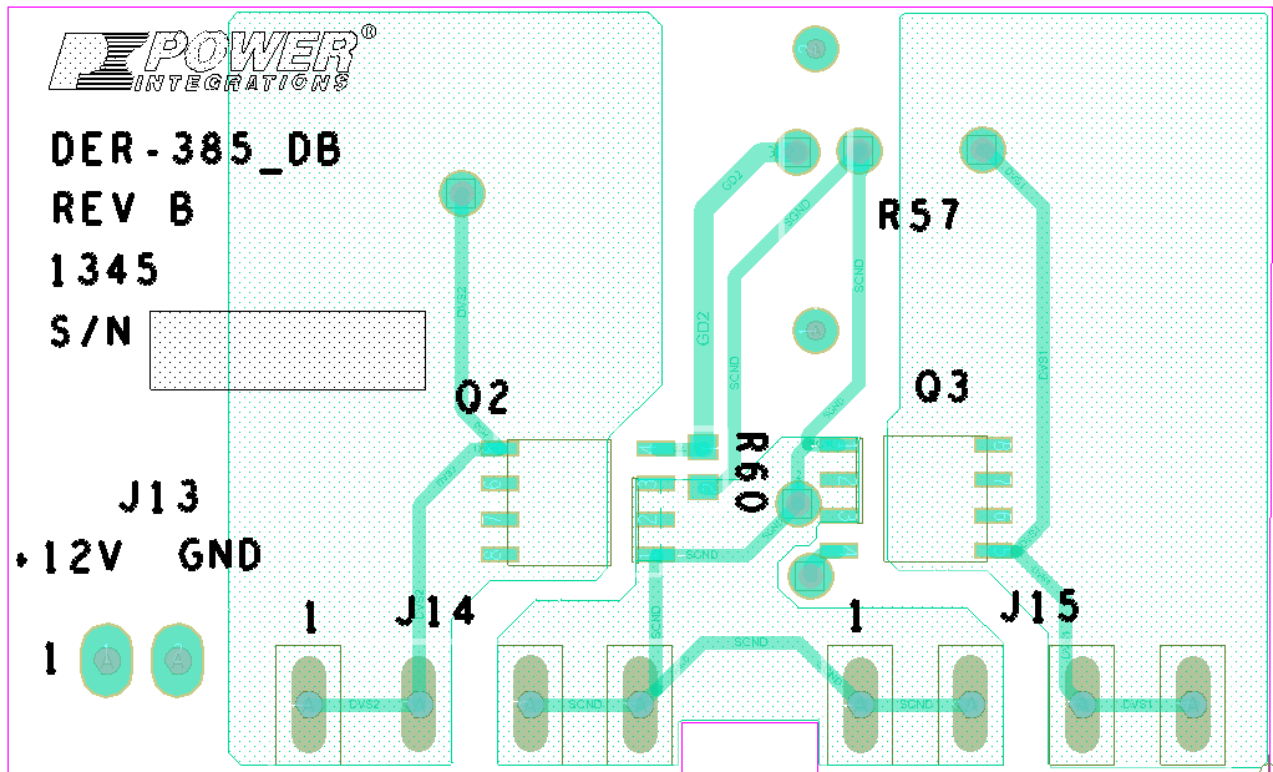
Printed Circuit Layout – Daughter Board, Top Side.
